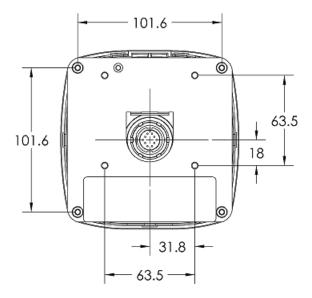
IDP-680 CID2 Side View Enclosure Dimensions (mm)
